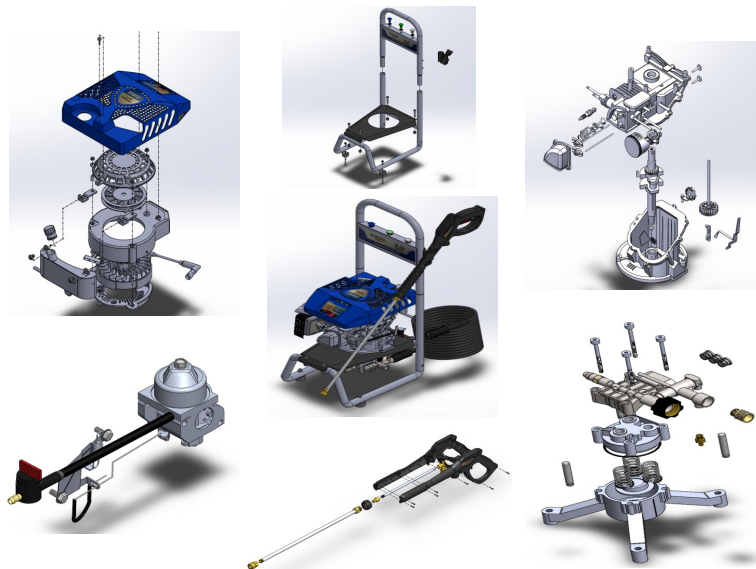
Gas pressure washer model assembly surrounded by exploded assemblies of main sub-assemblies produced by students. (Courtesy of IE 305 section 1 students)
